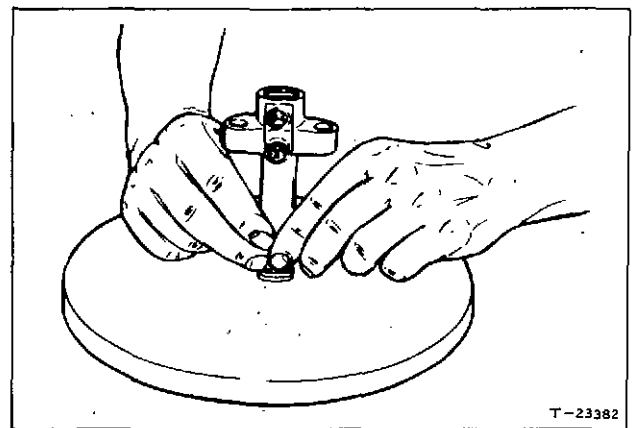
Lapping Fuel Injection Nozzle Holder Body
